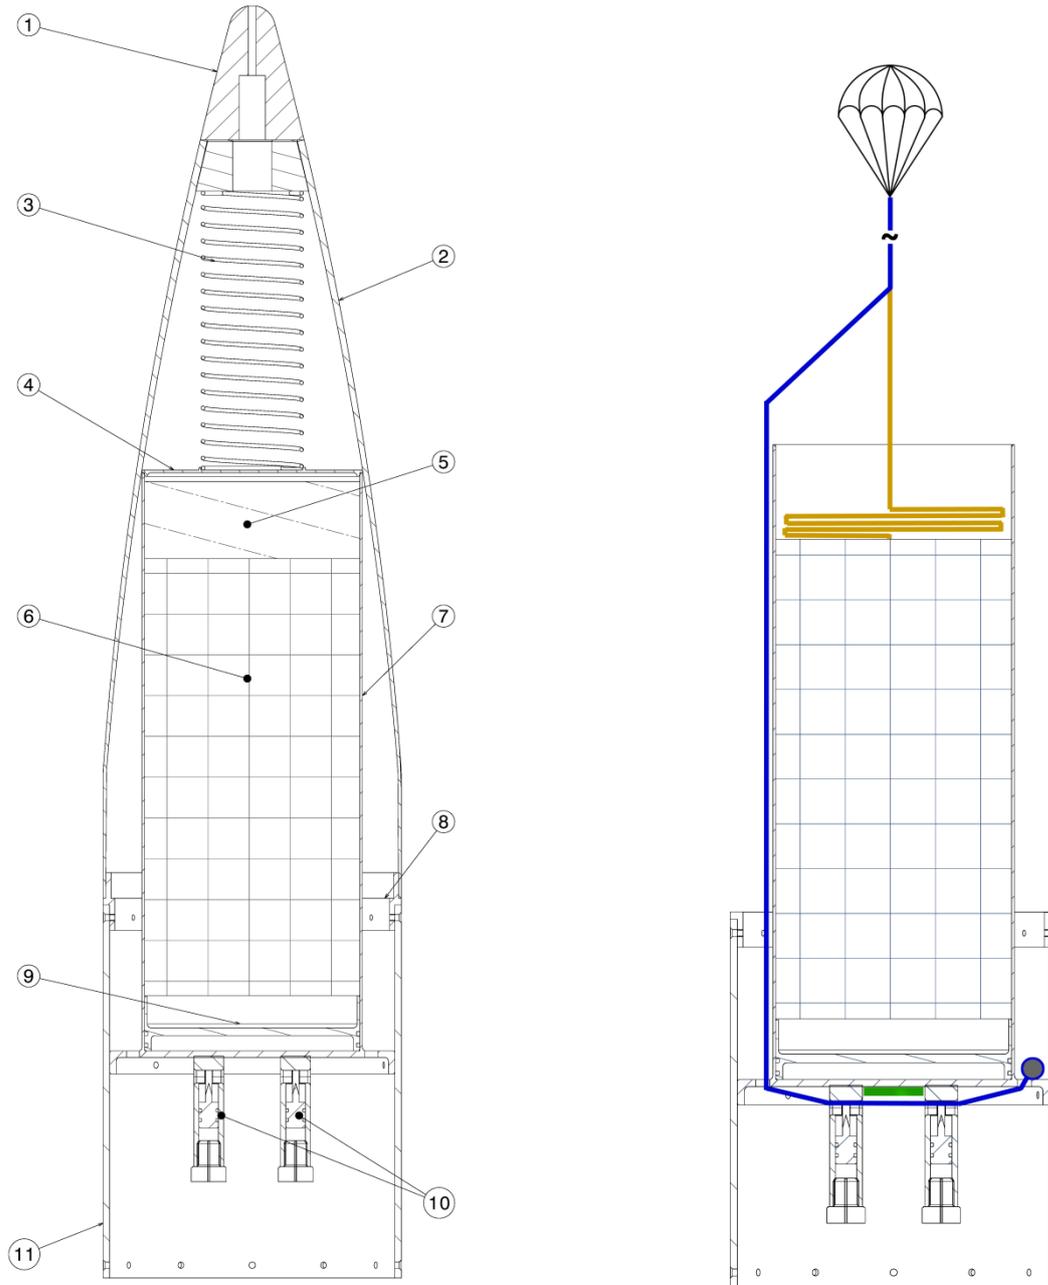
Complete scheme of the system before deployment (left) and with deployed drag parachute (right). 1 – top of the nose cone, 2- heat shield, 3 – spring, 4 – canister cover, 5 – drag parachute with pilot chute , 6 – main parachute, 7 – canister, 8 – pirotechnic separation ring, 9 – piston, 10 – riser cutters, 11 – rocket body. Blue line – drag parachute riser, orange – main parachute bridle to drag chute, green – main parachute riser.
